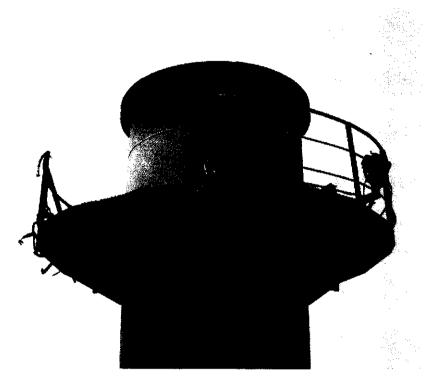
, General view of crane pedestal showing still intact inner slewing ring
